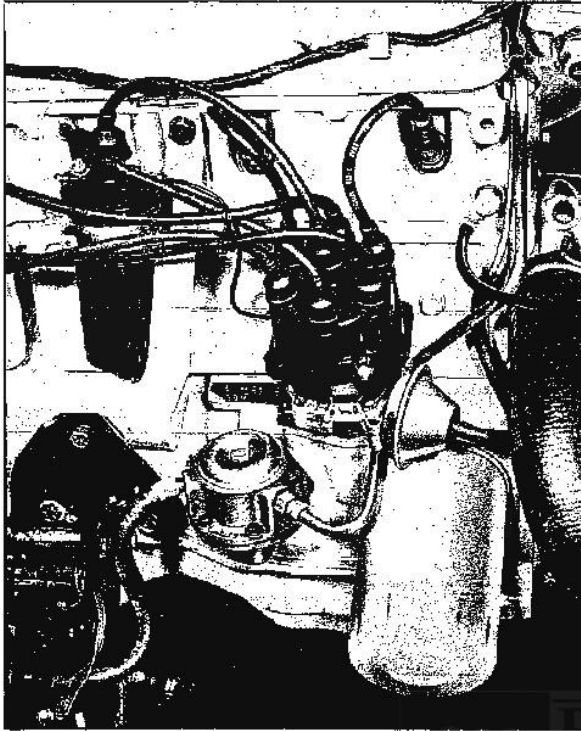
B-112 Fuel Pump Installed 6 Cylinder
